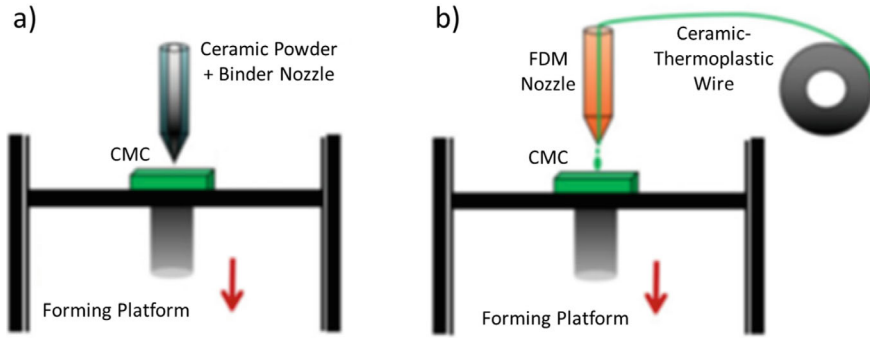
Schematic drawing of various direct additive manufacturing technologies for CMCs: a 3DP, b FDM [42]
